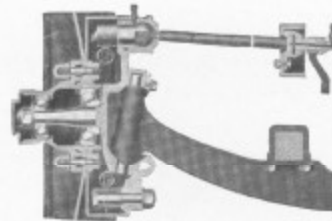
Checking front wheel assembly for alignment, camber, caster and toe-in. Price: 2 Blue Prints, 2 Job Sheets, 50c.
